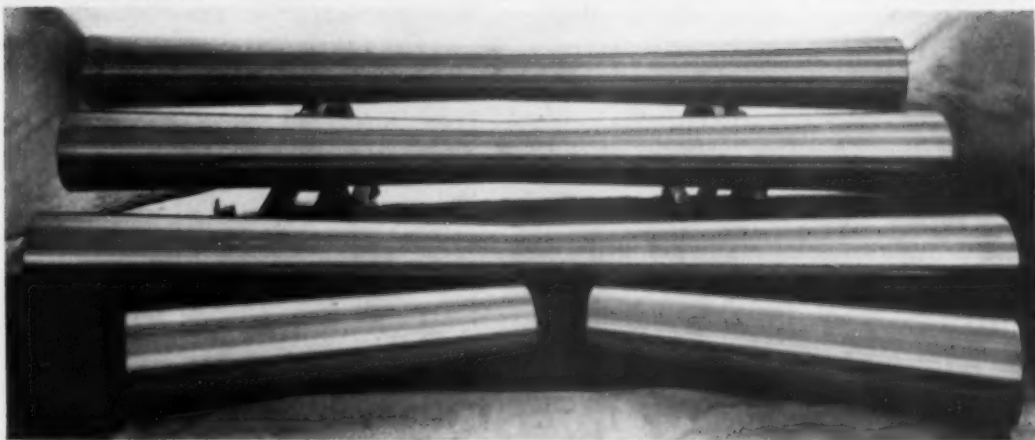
After forming tube is stress relieved, machined and welded into final product above.
